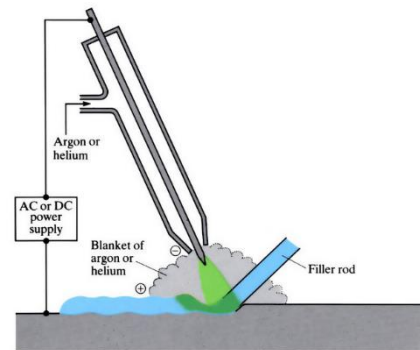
Principles of TIG welding (The Open University, 2018)
